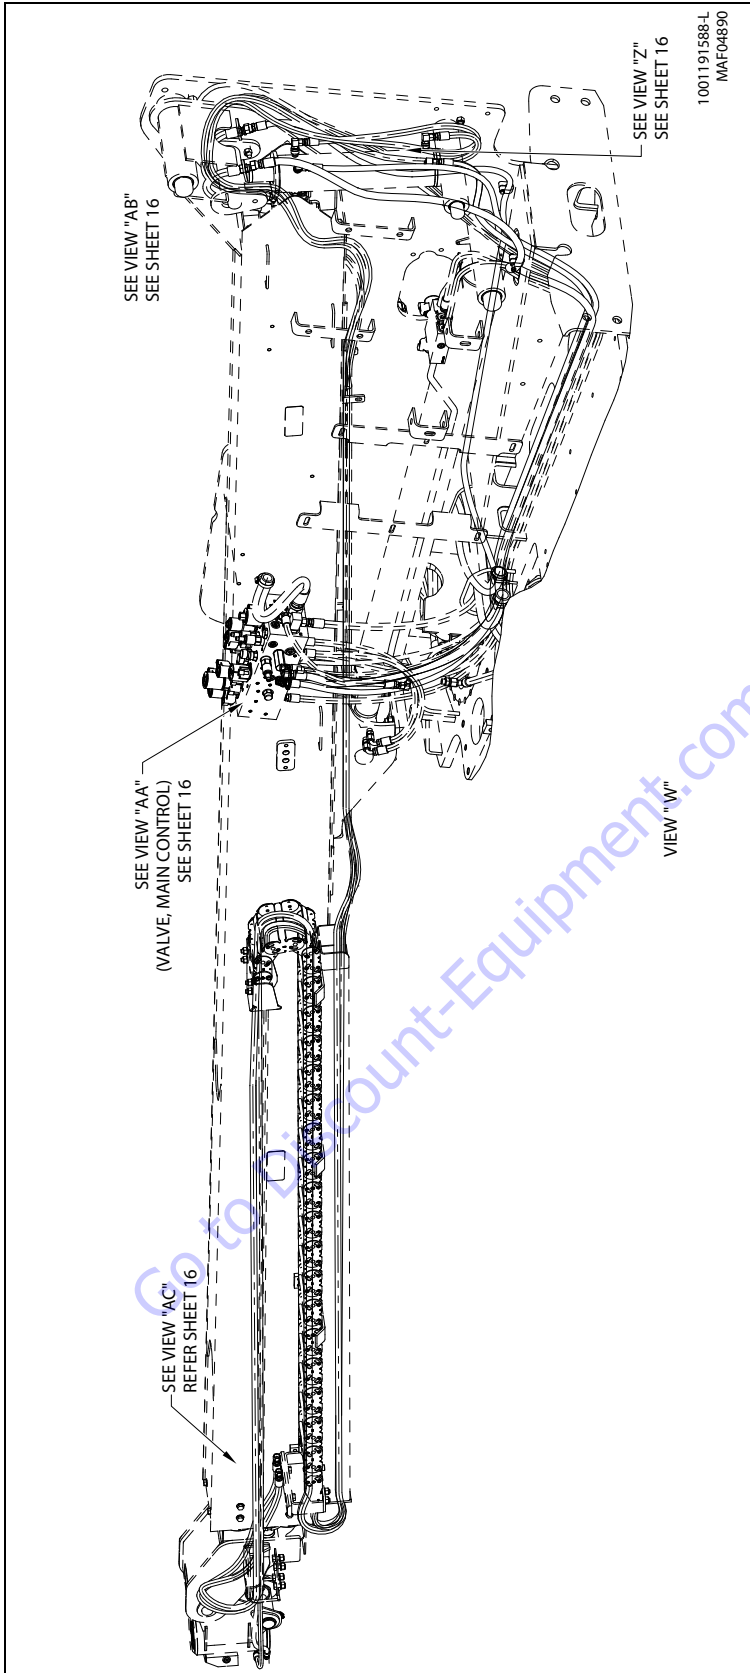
Hydraulic System Installation (400SC) - Sheet 15 of 16
